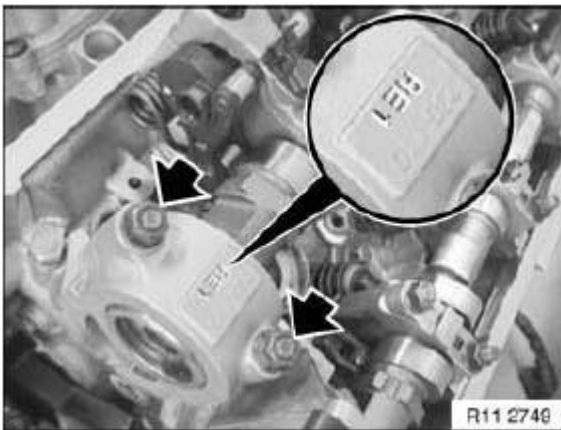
Locating Camshaft Bearing Caps Of Cylinders
